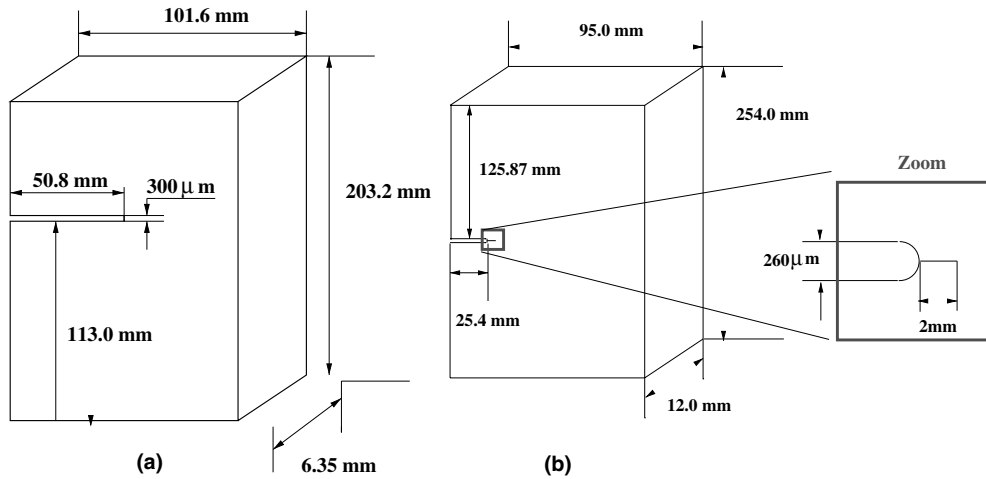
Configuration of single notch specimens: (a) specimen one; (b) specimen two.
